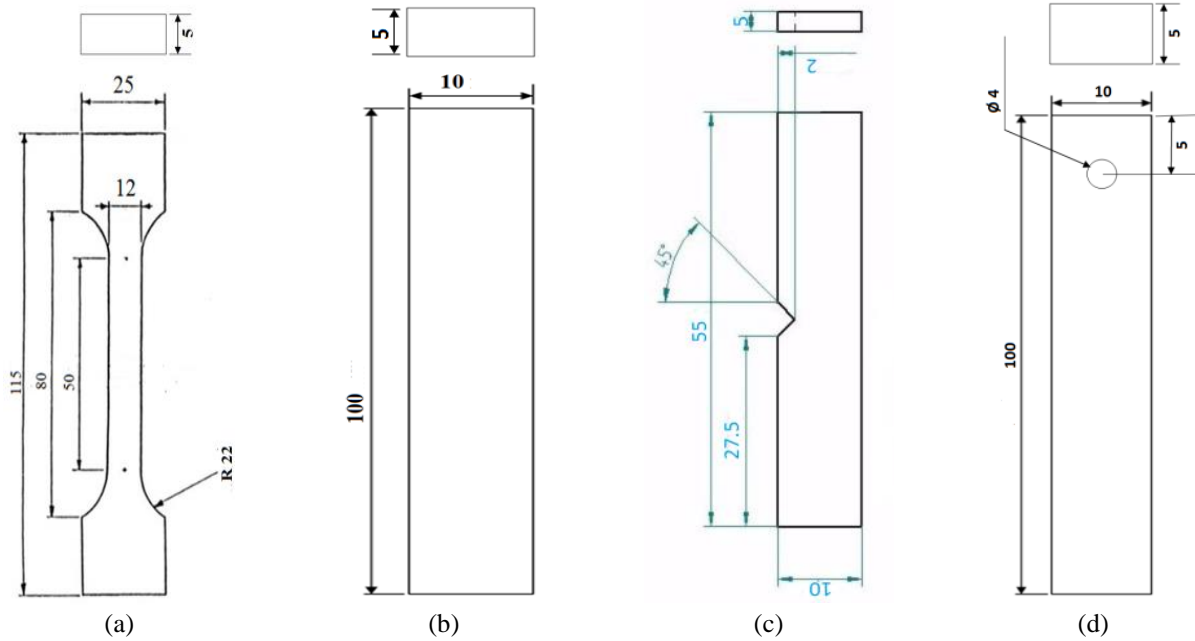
Schematic of the tests specimen for this study: (a) tensile test (b) flexural test (c) impact test (d) fatigue test (Note: All dimensions in mm)
